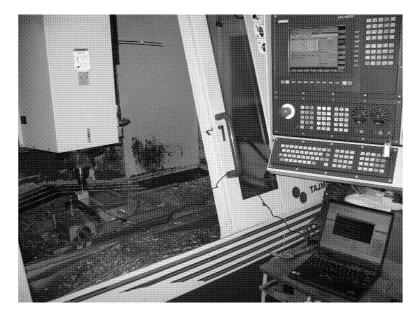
Experimental machine tool with direct linear drives and the Sinumerik 840D control system
